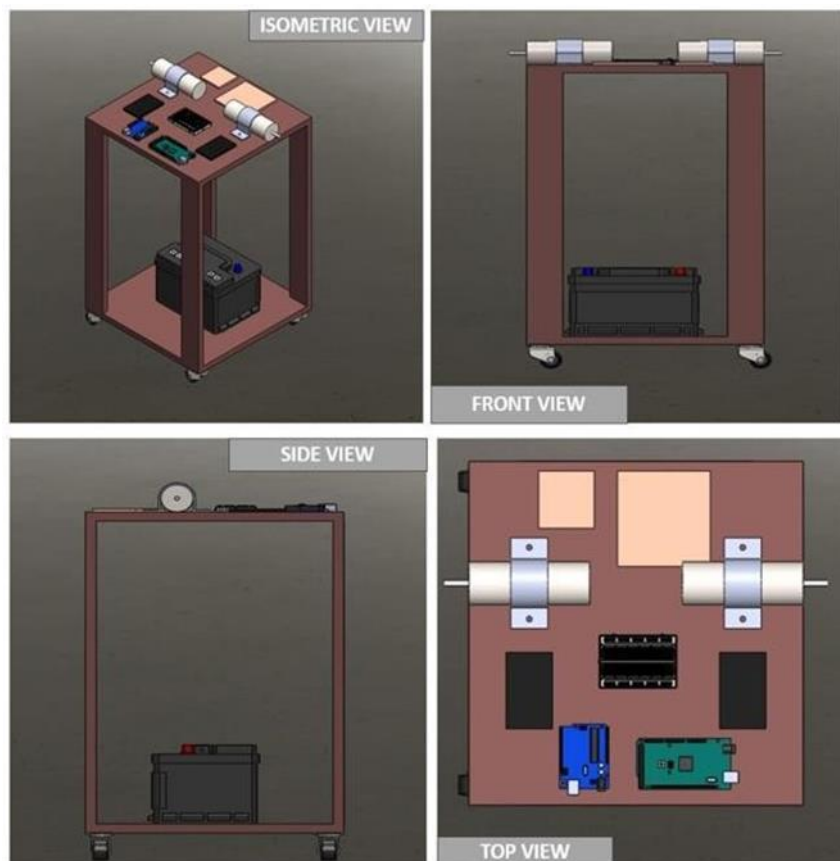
Isometric, Front, Side and Top views of Control Unit Carrier.
